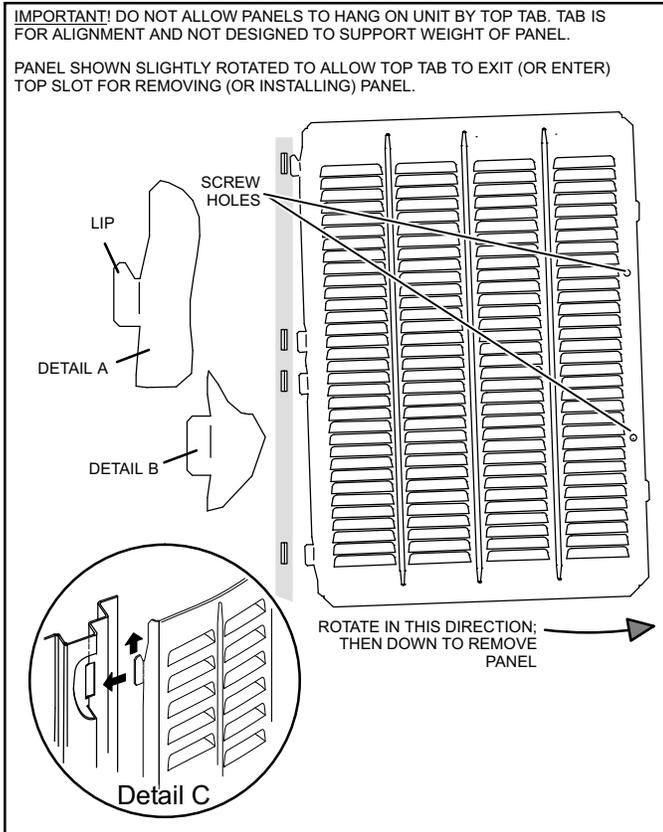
Removing/Installing Louvered Panels (Details A, B and C)
